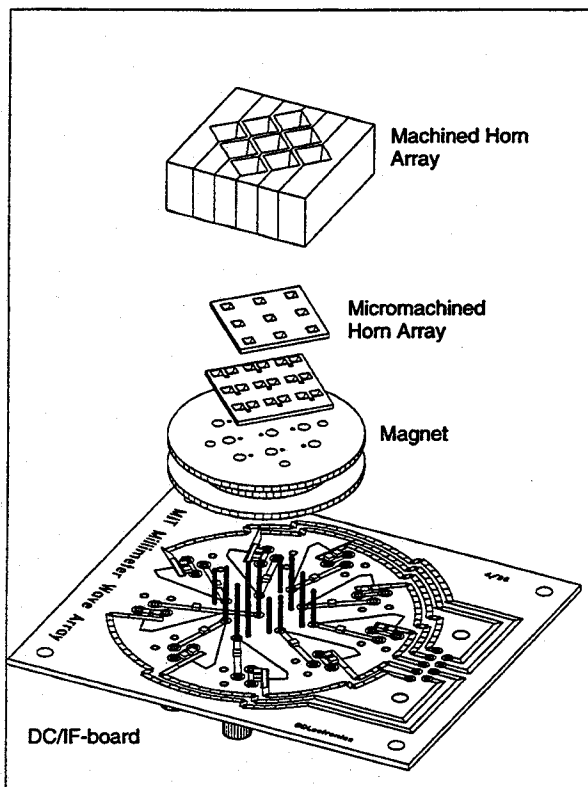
Expanded view of the array receiver showing the machined horn array, the micromachined array, the magnet, and the DC/IF-board
